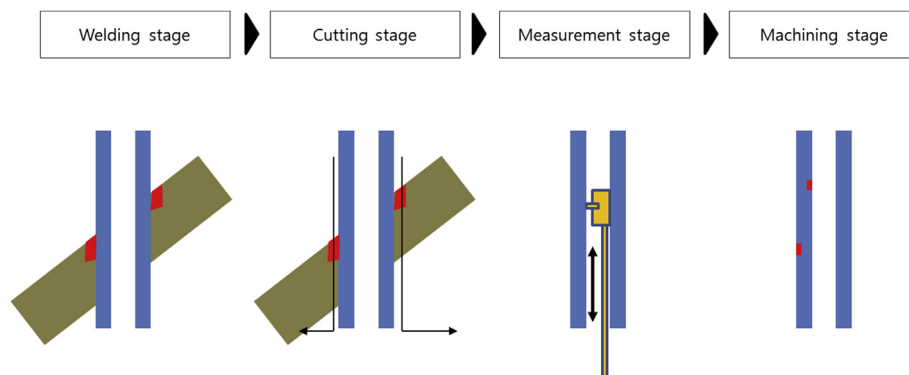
Manufacturing stages of surface geometry indication (SGI) mock-up.
